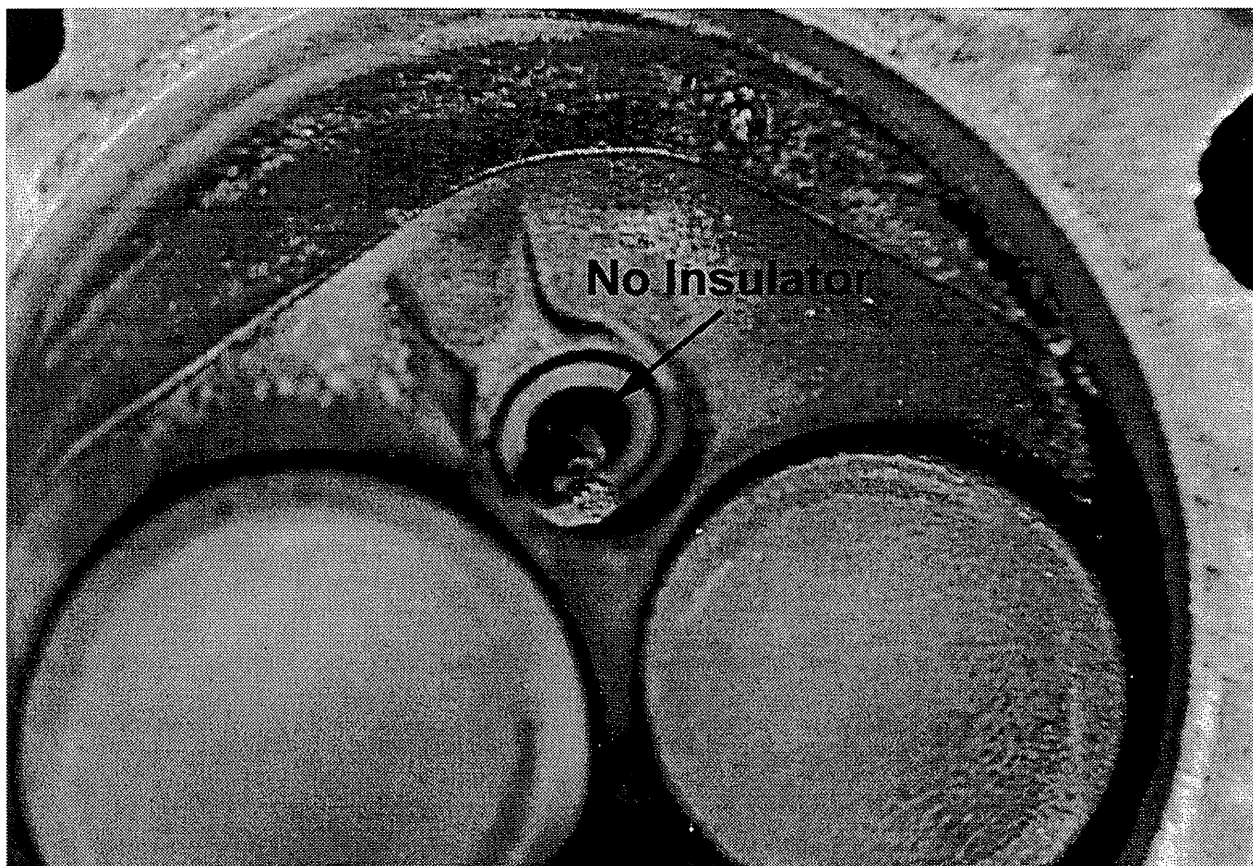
Cylinder head showing Cylinder 4 combustion chamber
